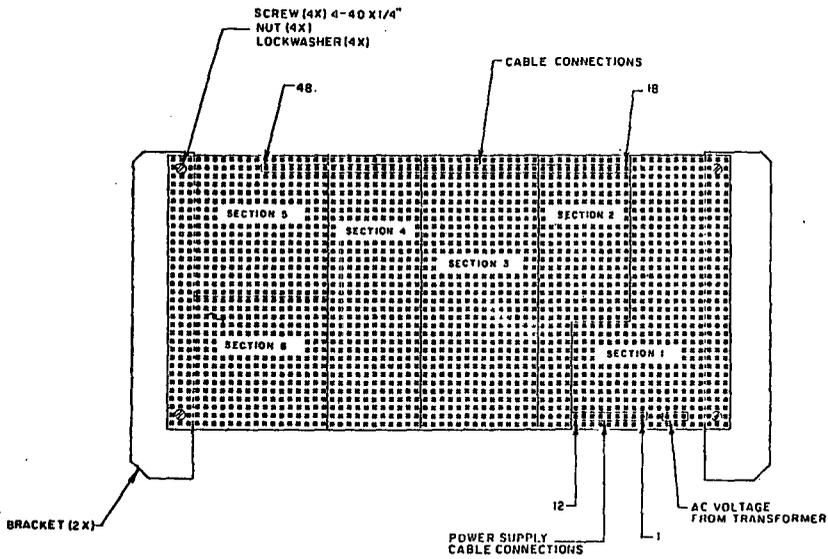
CIRCUIT CARD LAYOUT - COMPONENT SIDE
